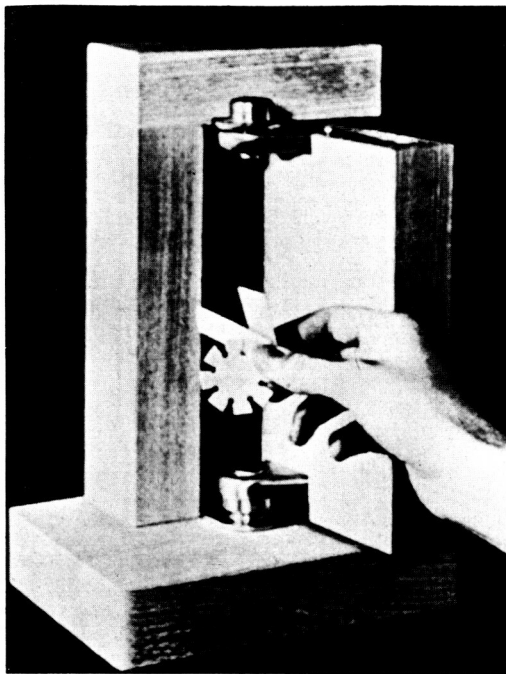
Door pivot bearings of glass-filled tape of duPont Teflon TFE resin.
